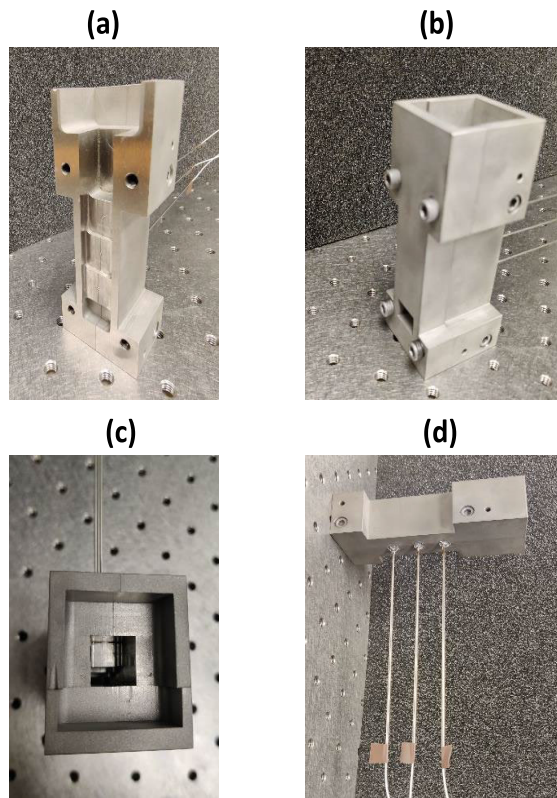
Flux mold with EFPI sensors installed, including shielding. (a) Back part of the mold with instrumented EFPIs. (b) Complete mold setup—front view. (c) Complete mold setup—top view. (d) Stainless steel tube shielding of the SMF cables.
